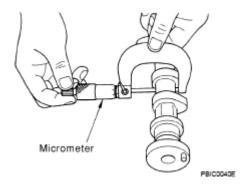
Checking Outer Diameter Of Camshaft Journal
